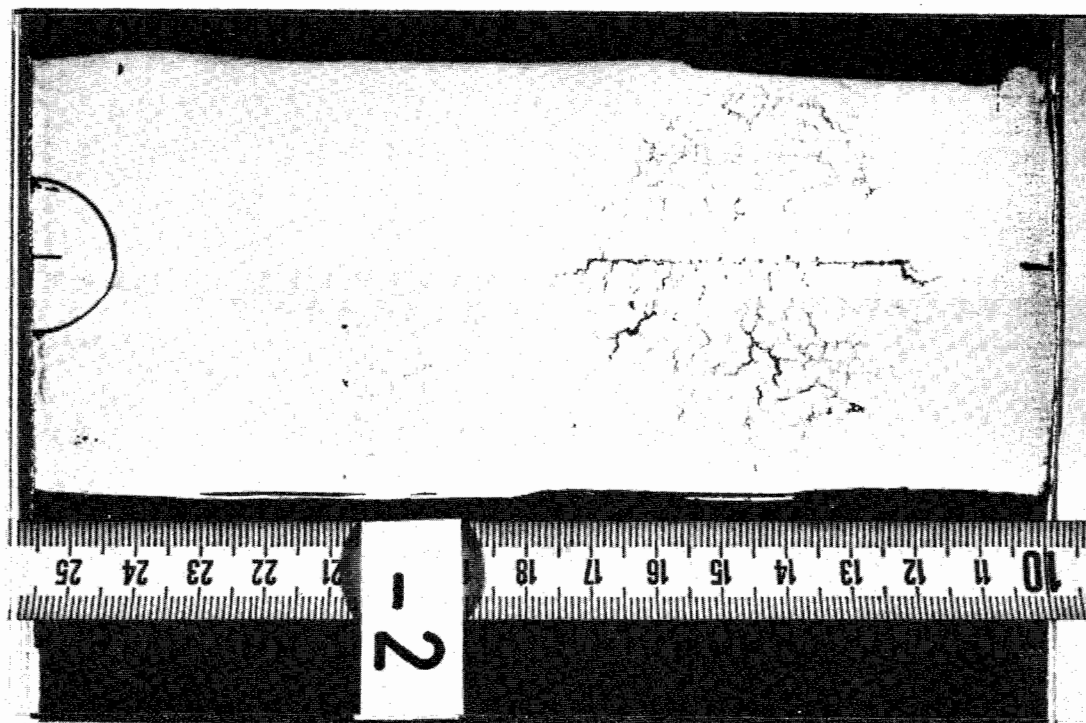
Specimen No. 2 : crack offset : + 1 mm
